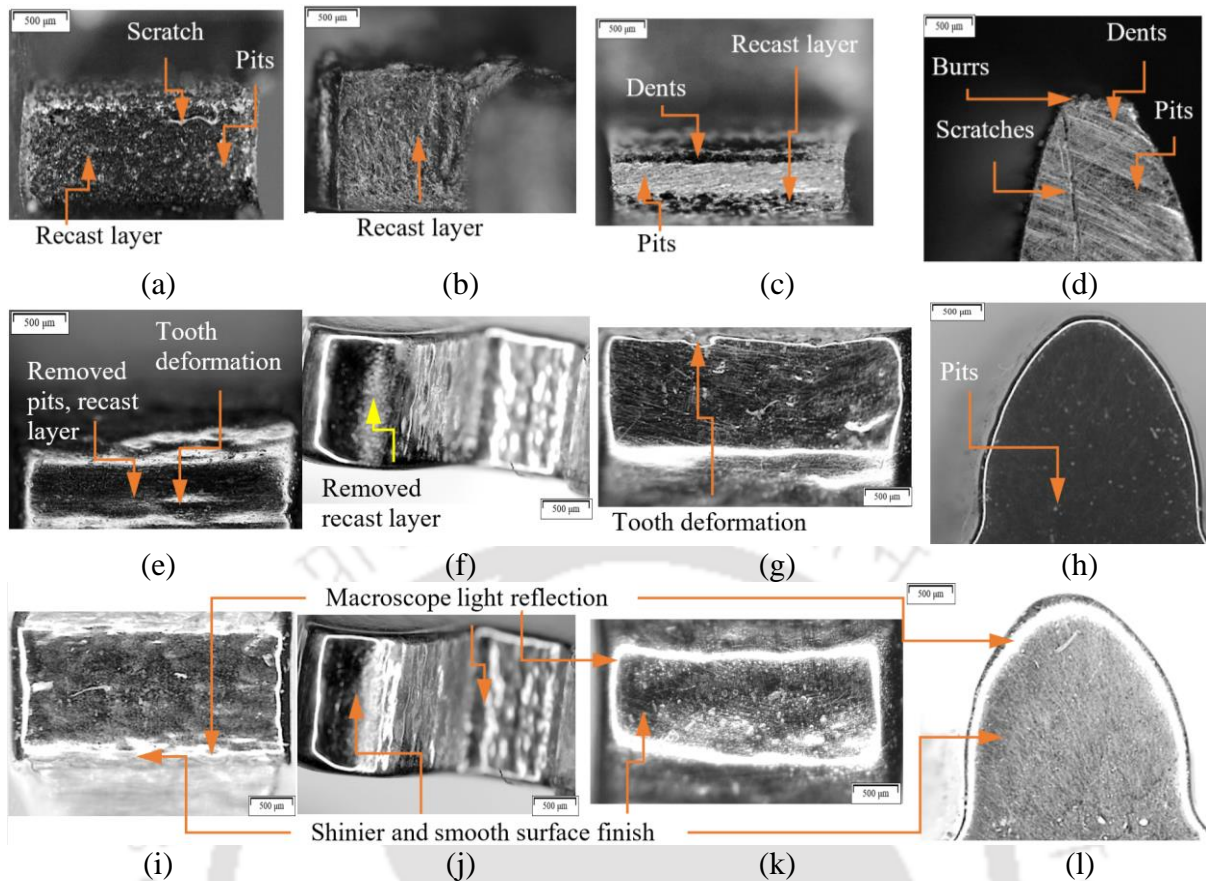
Macrographs of the tooth (a) in-between, (b) involute, (c) top and (d) face profiles of miniature gear before finishing, tooth (e) in-between, (f) involute, (g) top and (h) face profiles of miniature gear after finishing without using uniform flow restrictor, and tooth (i) in-between, (j) involute, (k) top and (l) face profiles of miniature gear after finishing with uniform flow restrictor
